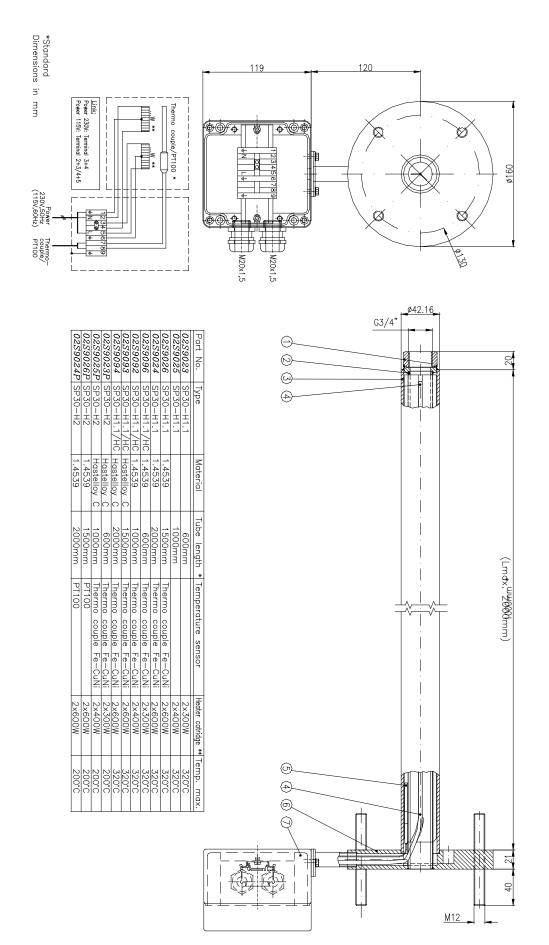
Electrically heated sample tube SP30-H1.1/-H2
